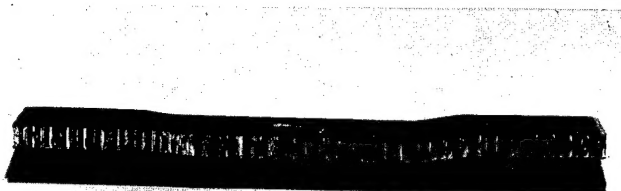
SANDWICH FLEXURAL SPECIMEN FAILURE
